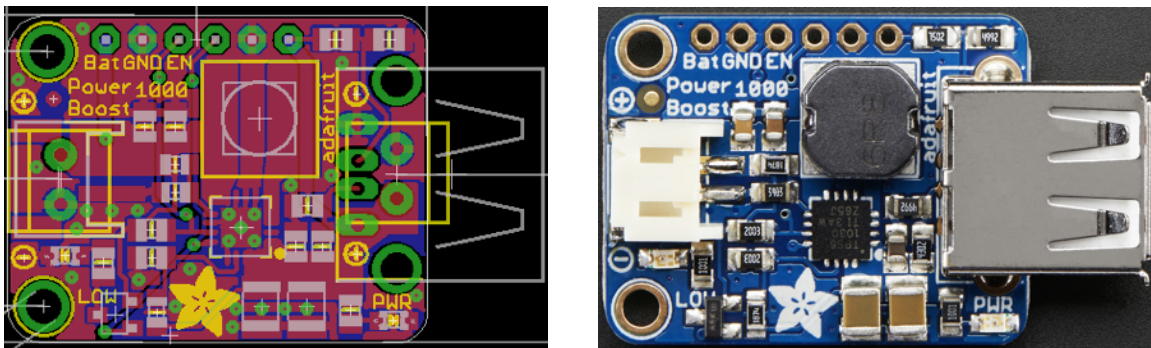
Left: A traditional PCB layout. Right: the finished PCB (adafruit.com).
